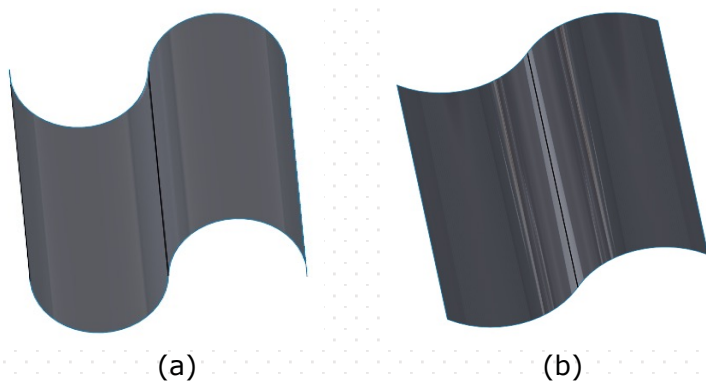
CAD model of S-rotor VAWT (a) Conventional rotor design (b) Modified rotor design
